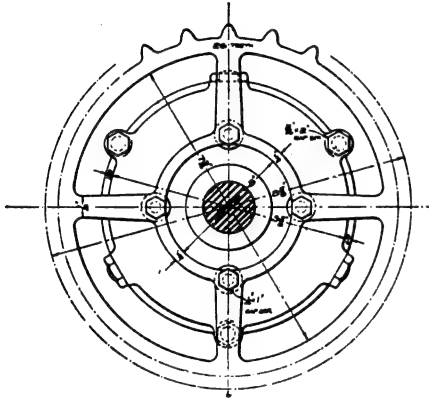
END VIEW OF DIFFERENTIAL GEAR AND SPROCKET.
